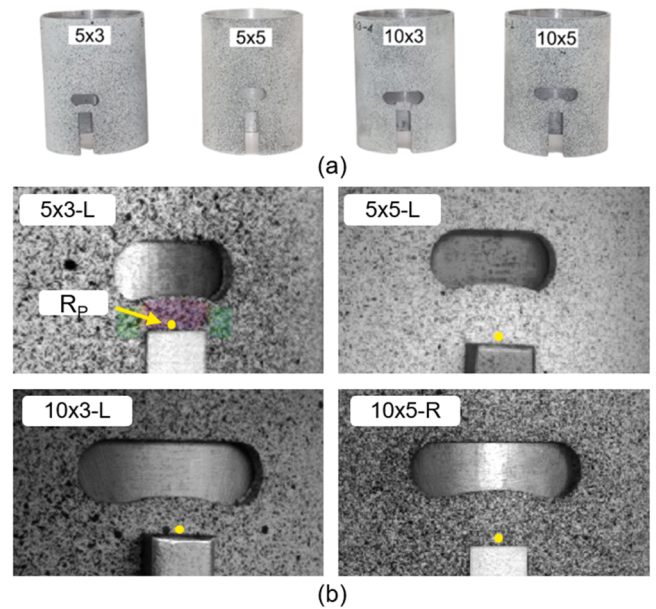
Resulting specimens of the STC test: (a) Specimens tested until fracture, and (b) detailed fracture zone depicting the reference points used for the assessment of failure. The label $w \times h$ within (b) represents the width and the height of the groove, respectively, whereas L and R indicate the side at which fracture occurred.
